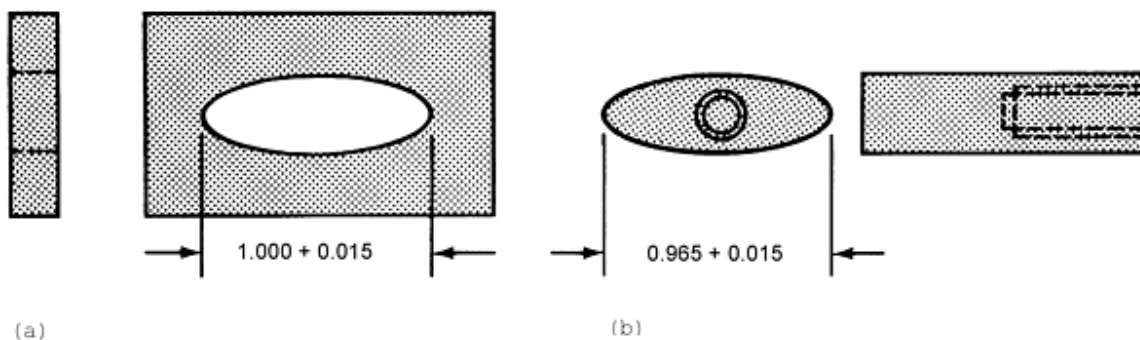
Pin and hole components statistically analyzed in Example 2. (a) Plate with hole. (b) Pin assembly. Dimensions given in inches
